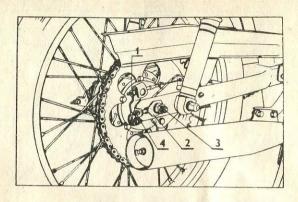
Adjusting of rear brake and engine drive transmission chain
